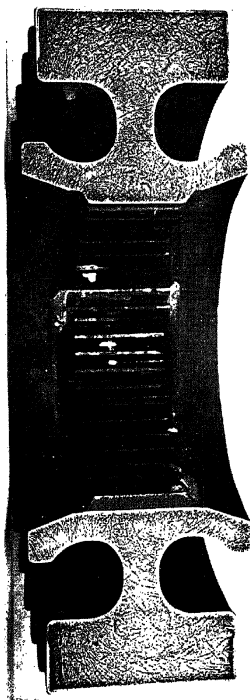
Macrostructure of Jumo 211A spur gear.
